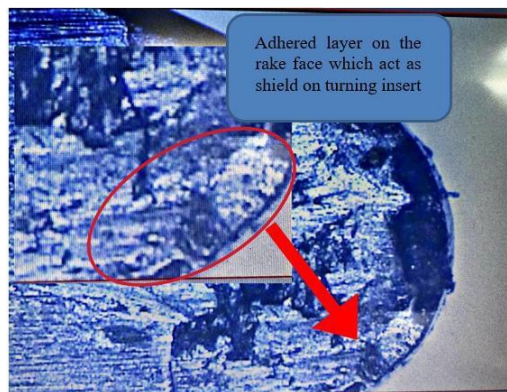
Microscope of cutting edge at cutting speed 160 rpm, feed rate 0.05 mm/tooth, axial depth 1.25 mm under MXENE-NFC coolant at 80 mm of cutting distance.
